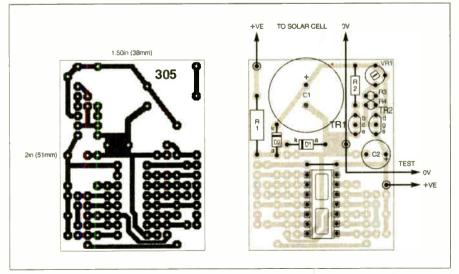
Uniboard Power Supply and Voltage Regulator component layout and full-size copper foil master. Not all the holes/pads are used.
